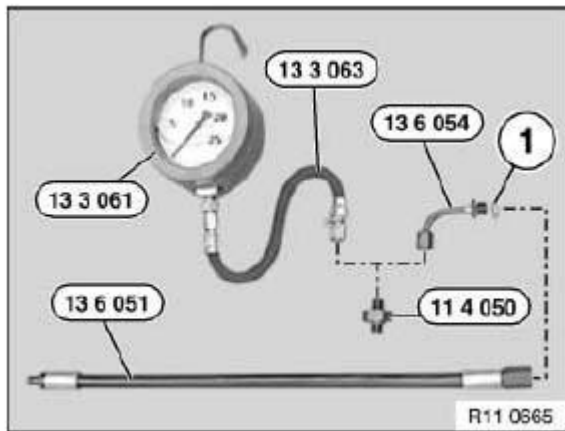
Identifying Special Tools 13 3 063 And 13 3 061
